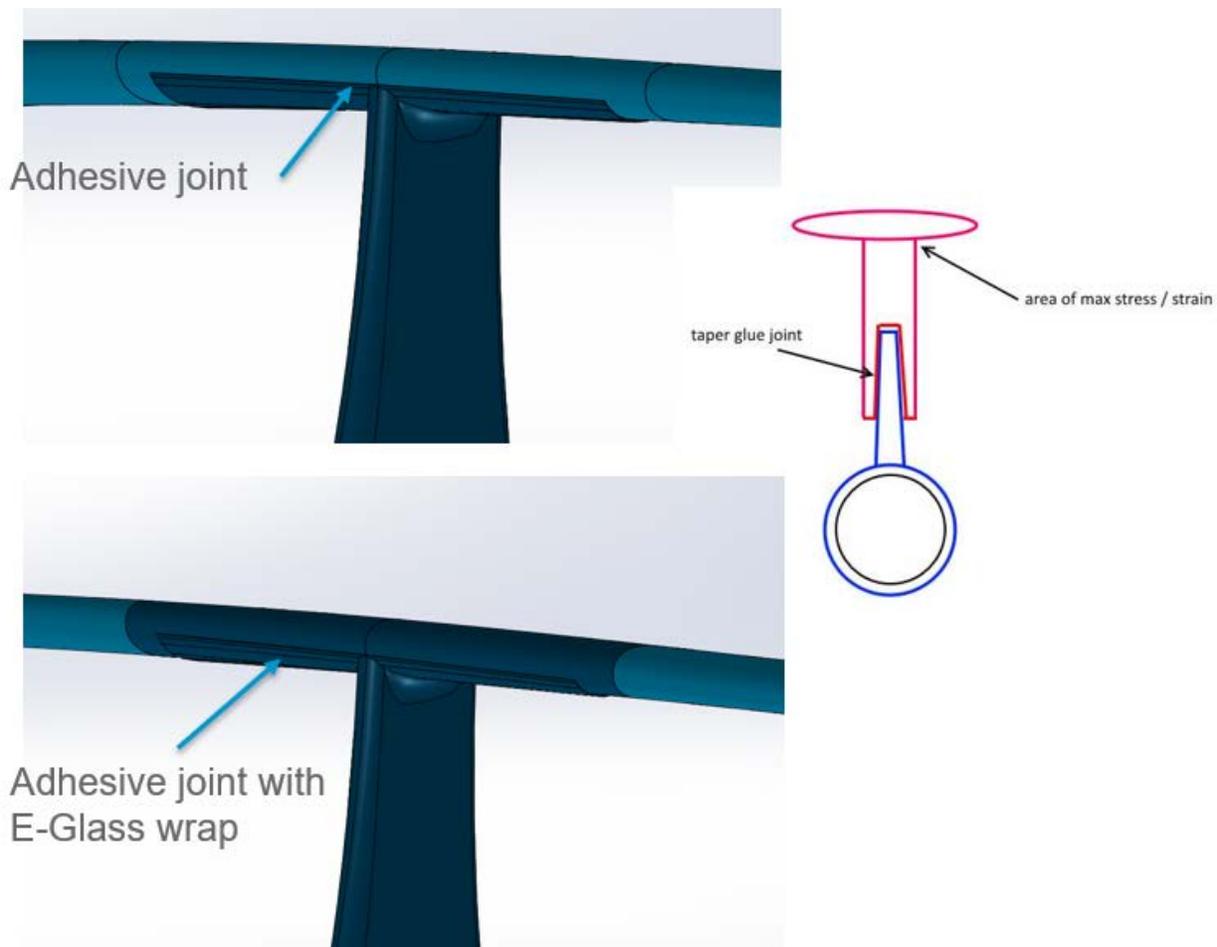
Potential bonded joints between foil and strut. Joint testing would be performed by the manufacturer to verify predicted structural properties prior to the first turbine build.
